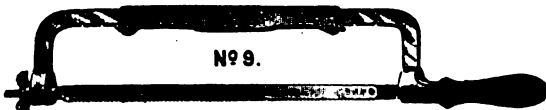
ADJUSTABLE HACK SAW FRAME.
